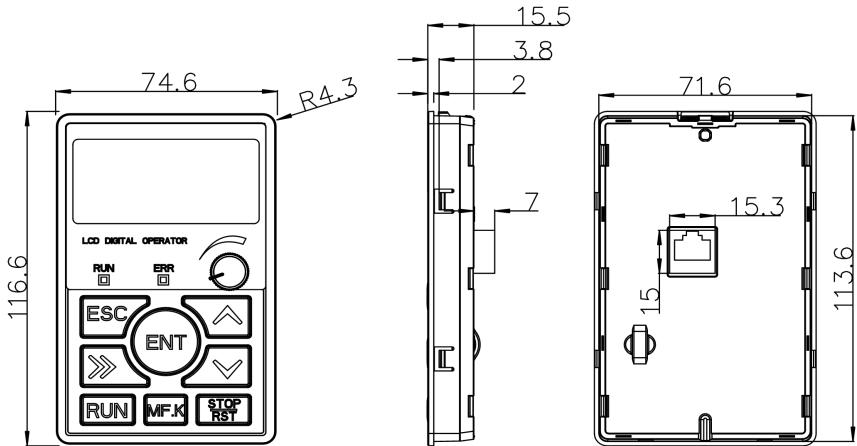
Dimensions of 7.5~110kW operation keyboard
